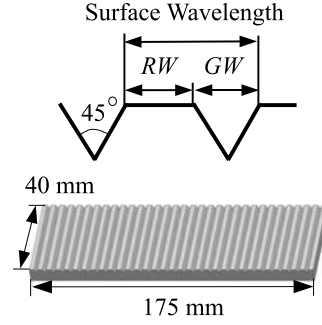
Trapezoidal Grating Scale: Cross-sectional View and Overall View
